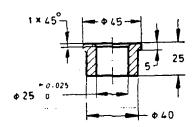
HEAD ASSEMBLY PARTS — Contd
